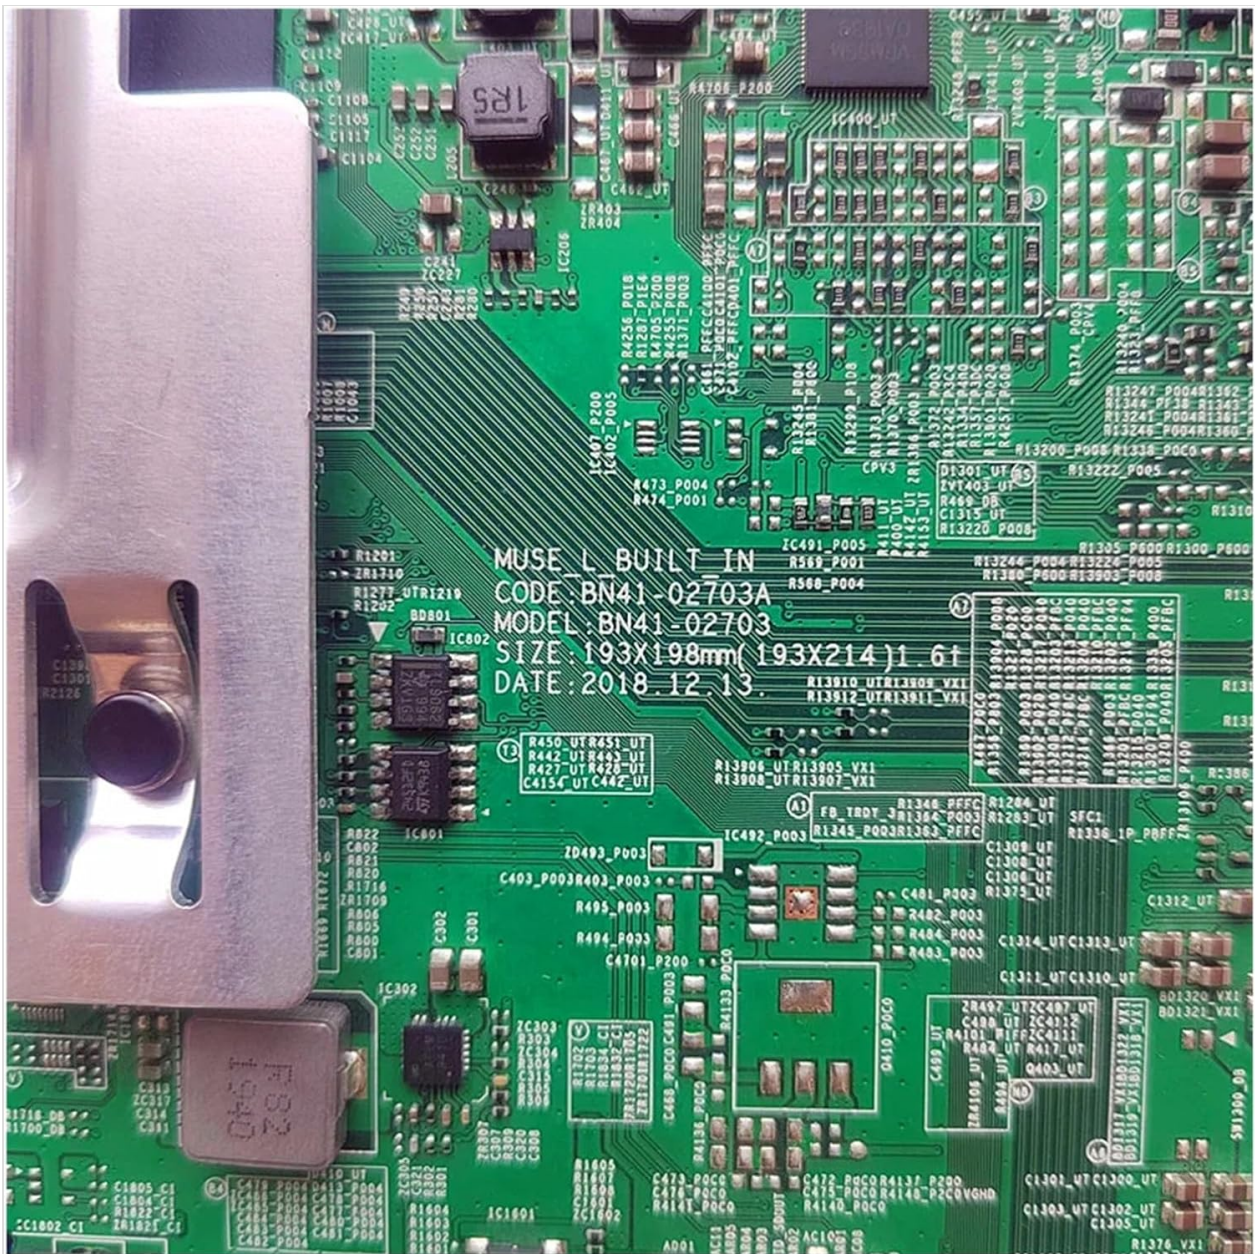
Close-up view of the main board label indicating the model code BN41-02703A.
